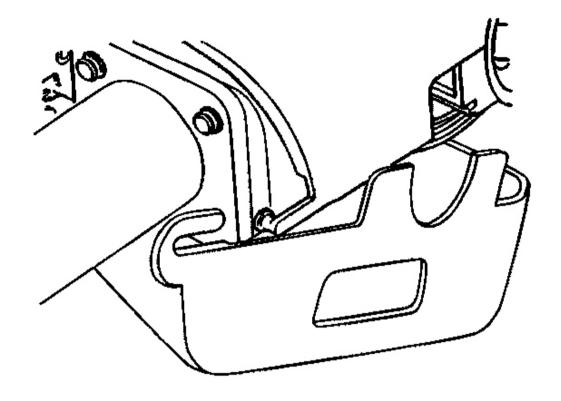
Disengaging Upper Trim Cover Courtesy of GENERAL MOTORS CORP.
